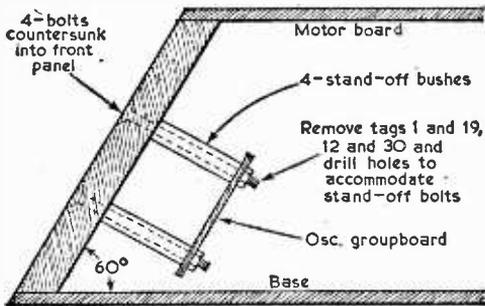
The method of mounting the oscillator group board on the front panel of the cabinet.
